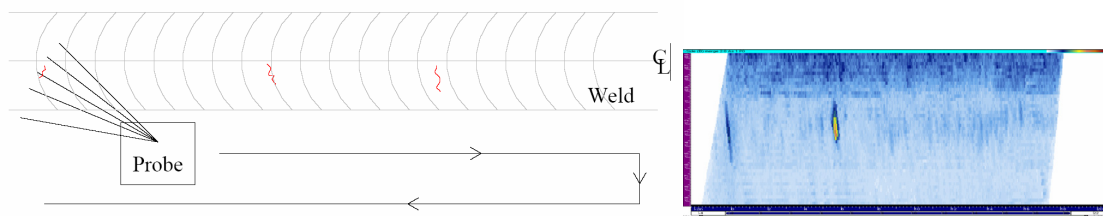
Ultrasonic Phased array inspection of dissimilar metal weld by changing the skewing angle to detect axial defects (Landrum et al. 2002).
